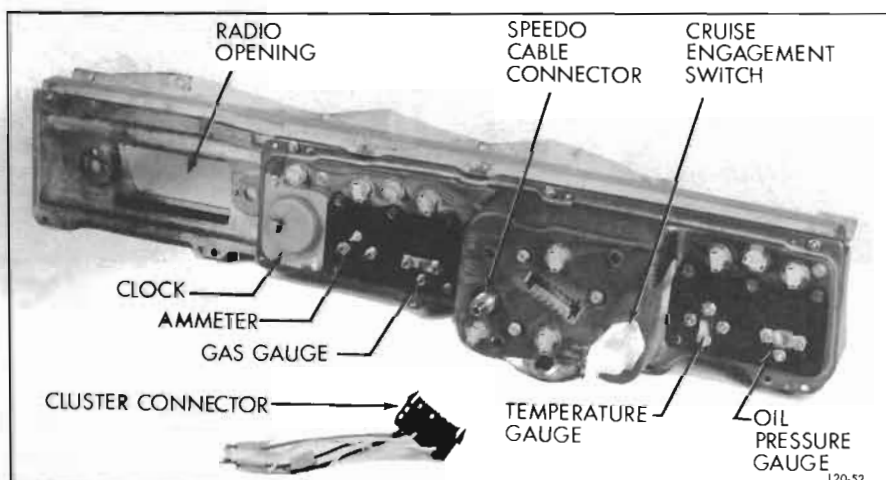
Back of Instrument Cluster Assembly - Riviera
